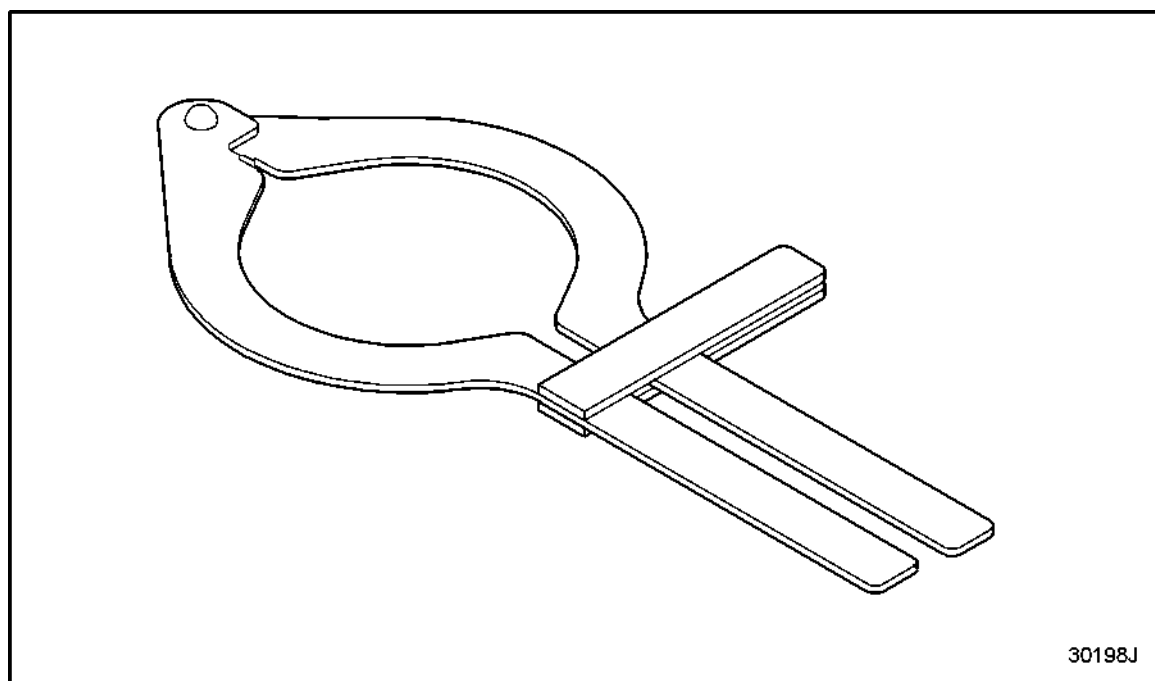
Seal Ring Compressor (Croschd Piston), J 23453
